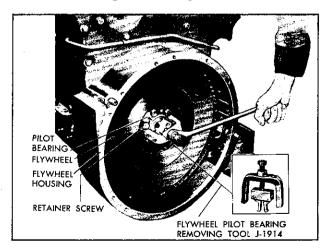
Removing Clutch Pilot Bearing from Flywheel with Tool J-1914.
